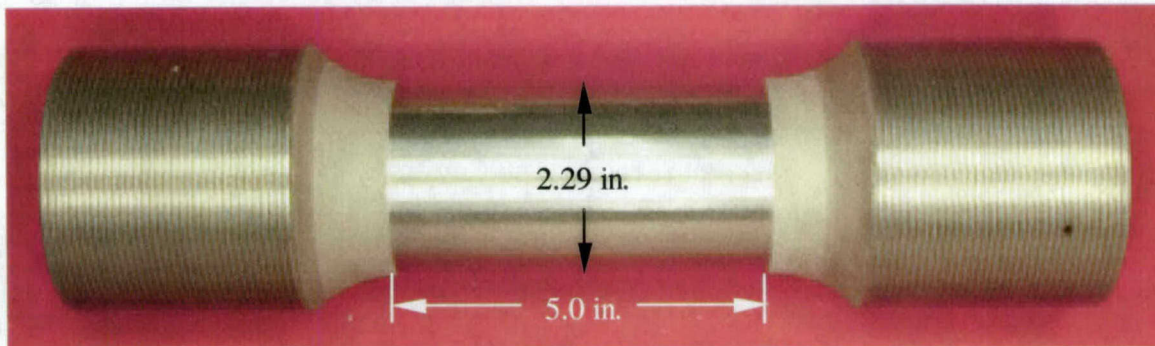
Tubular Axial Fatigue Specimen Coated with Diamalloy 2005 in the Gage Section
